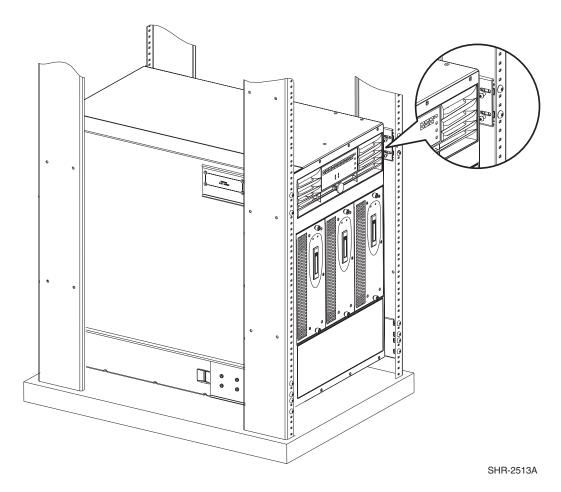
Attaching the upper rack mount bracket to the L-shaped brackets
